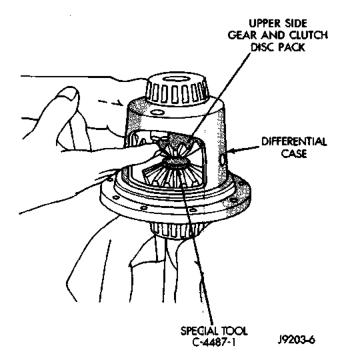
Upper Side Gear & Clutch Disc Pack Installation
